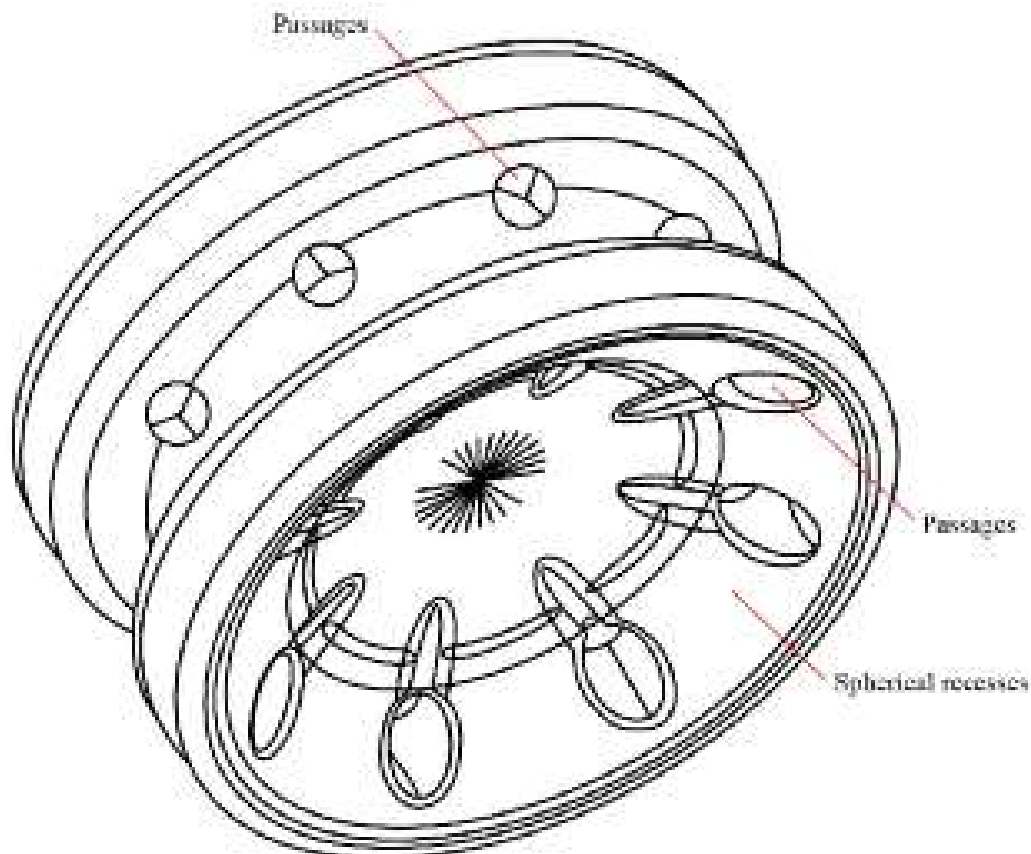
An isometric view of the separator used to divide the balls in each blade bearing.
